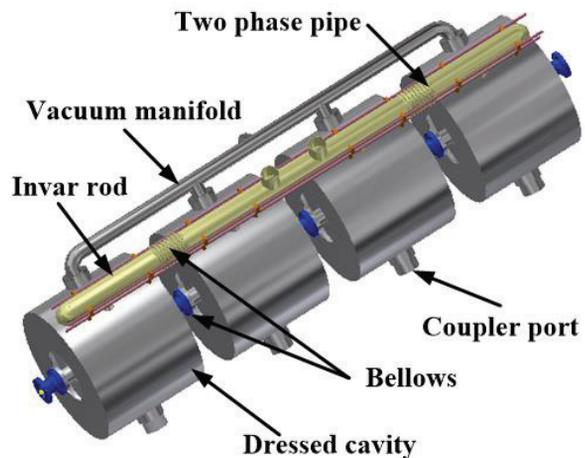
3D drawing of cold mass assembly of SSR1 cryomodule.
